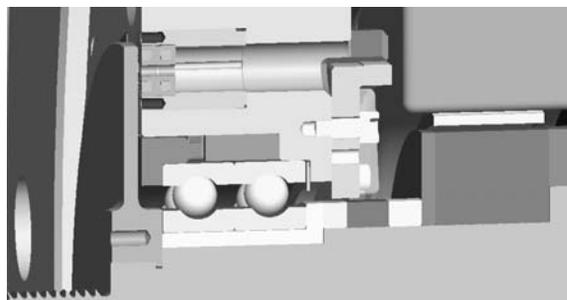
Cross-section showing radial/thrust backup bearing.
